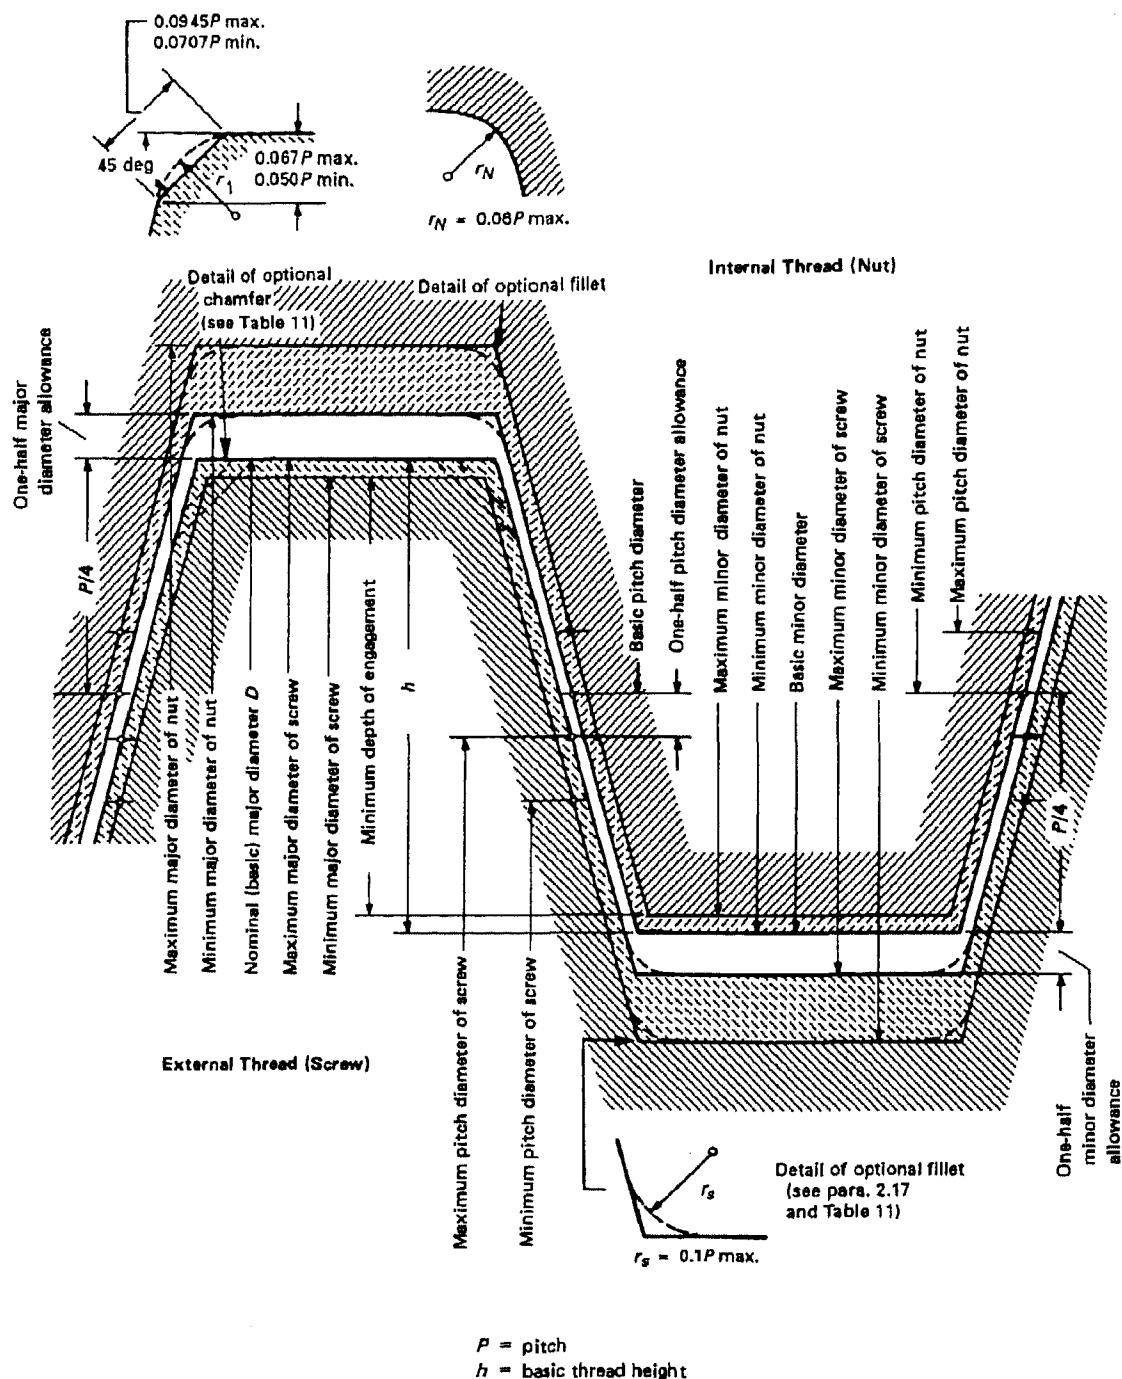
DISPOSITION OF ALLOWANCES, TOLERANCES, AND CREST CLEARANCES FOR GENERAL PURPOSE SINGLE-START ACME THREADS (ALL CLASSES)
